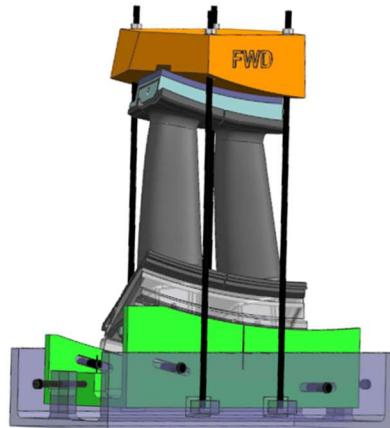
Assembly fixture design, metal fit check, CMC fairing installation
